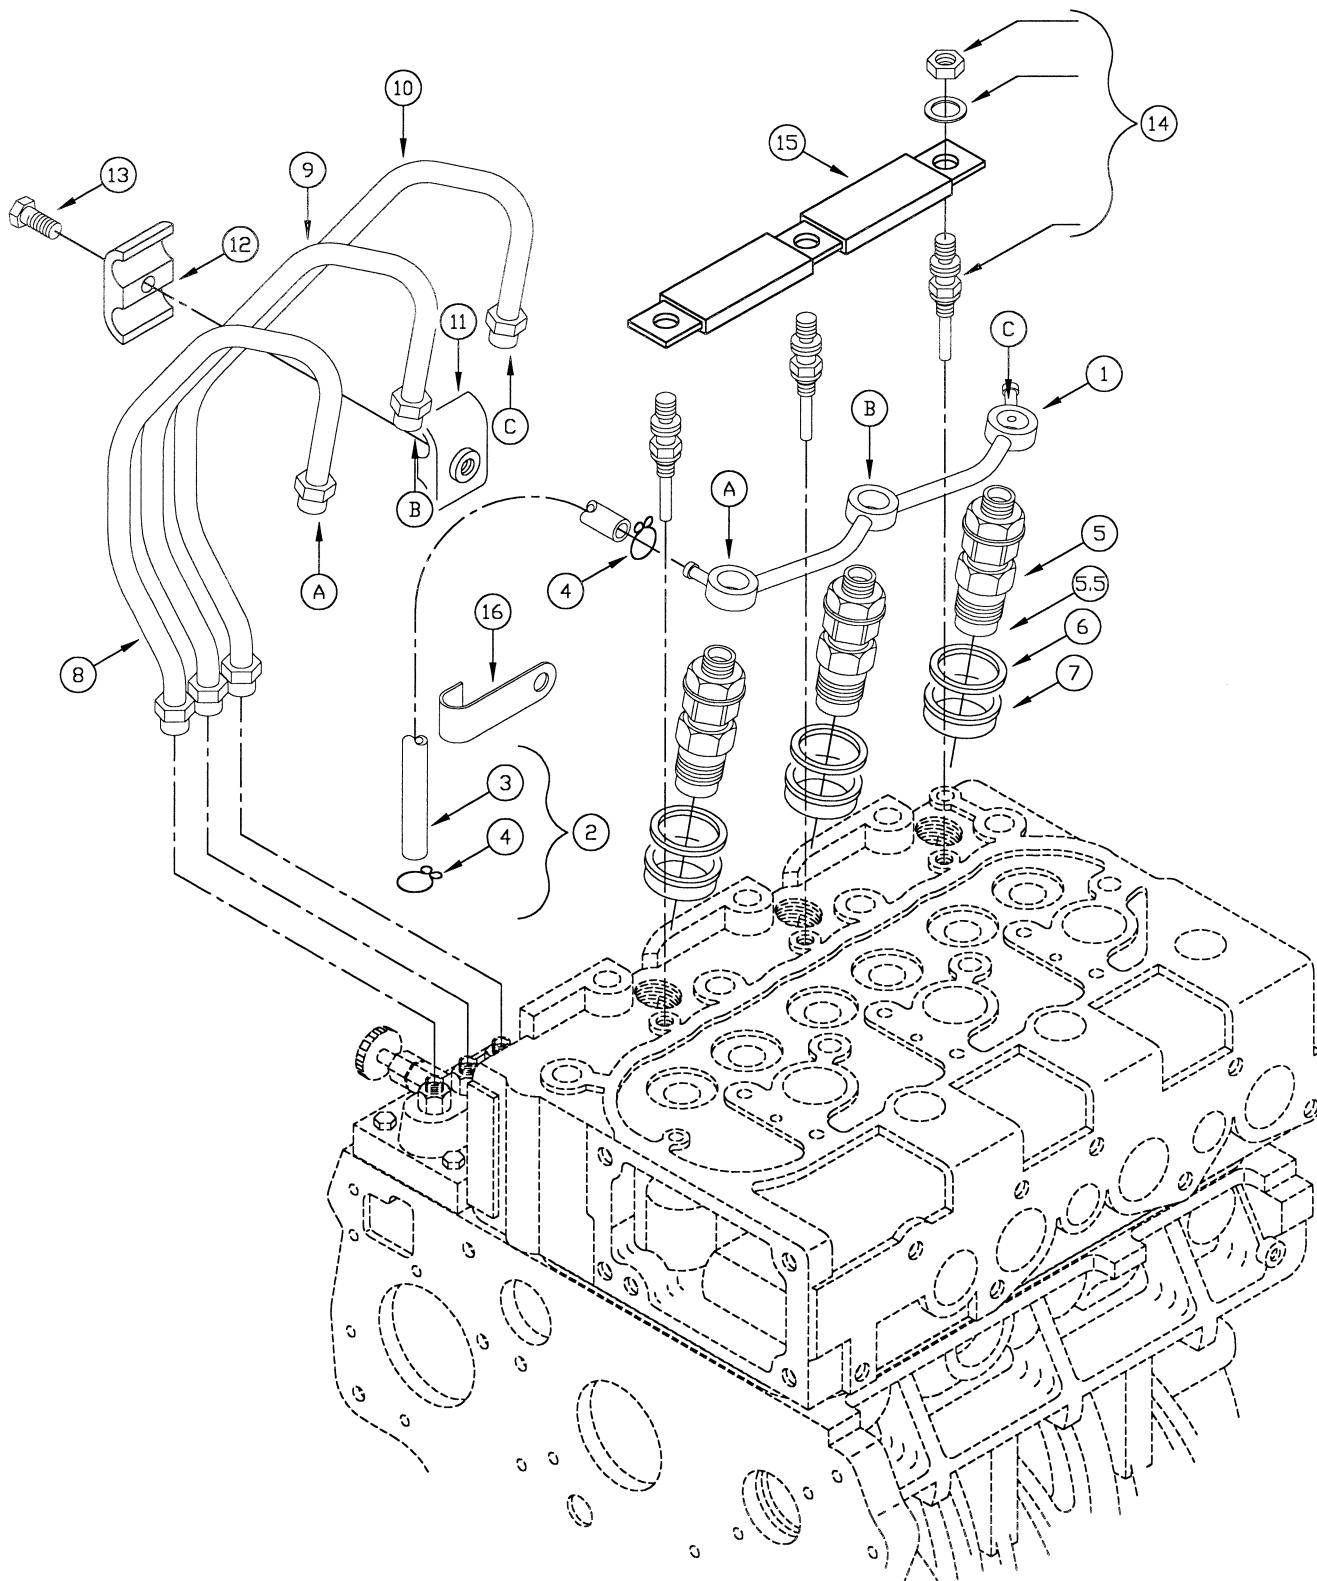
Nozzle Holder and Glow Plug, Engine Group
